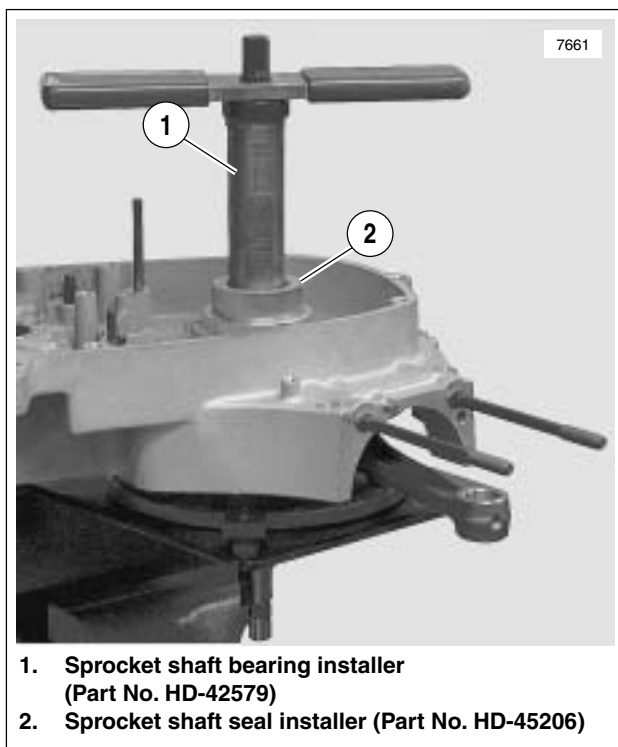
Installing Sprocket Shaft Oil Seal/Spacer
